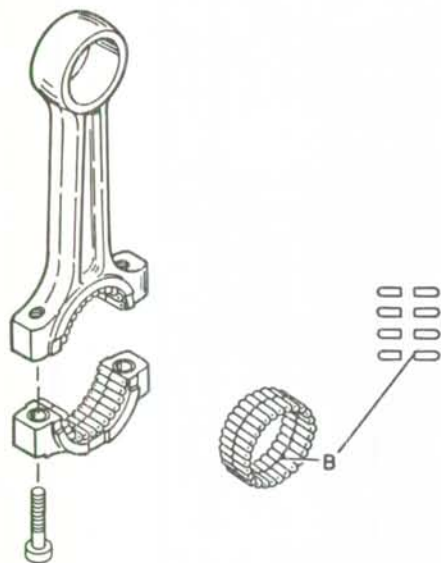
A—On some models, 56 loose needle rollers are used for crankpin bearing. Rollers are placed in two rows of 28 each. Be sure that flat ends of rollers are butted together as shown at (B).
